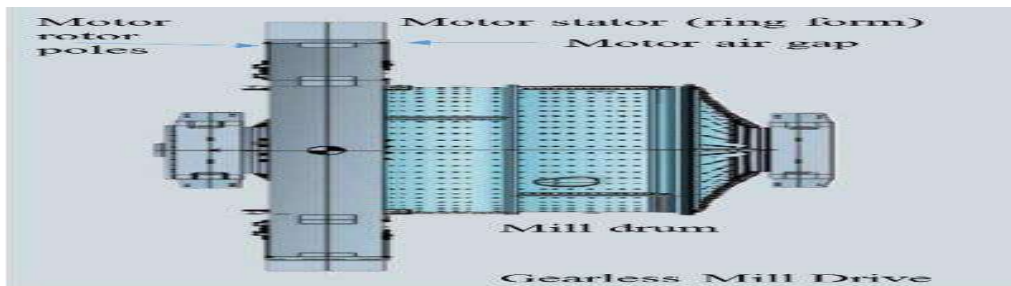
Schematic of Typical Gearless Mill Drive system [6]
